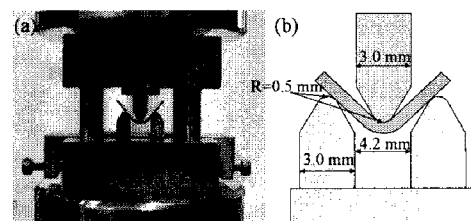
Photo showing (a) Air-bending die-set and (b) dimensions of punch/die and die opening width
